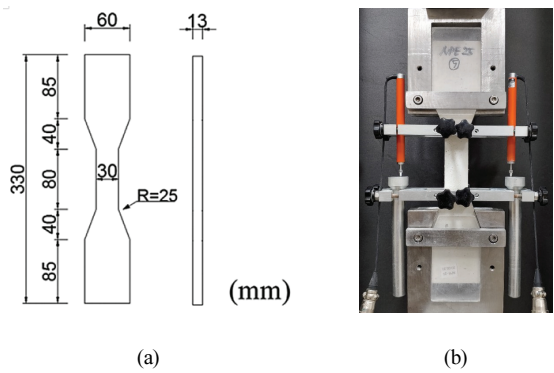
(a) Dimension of tensile specimen and (b) tension test setup
